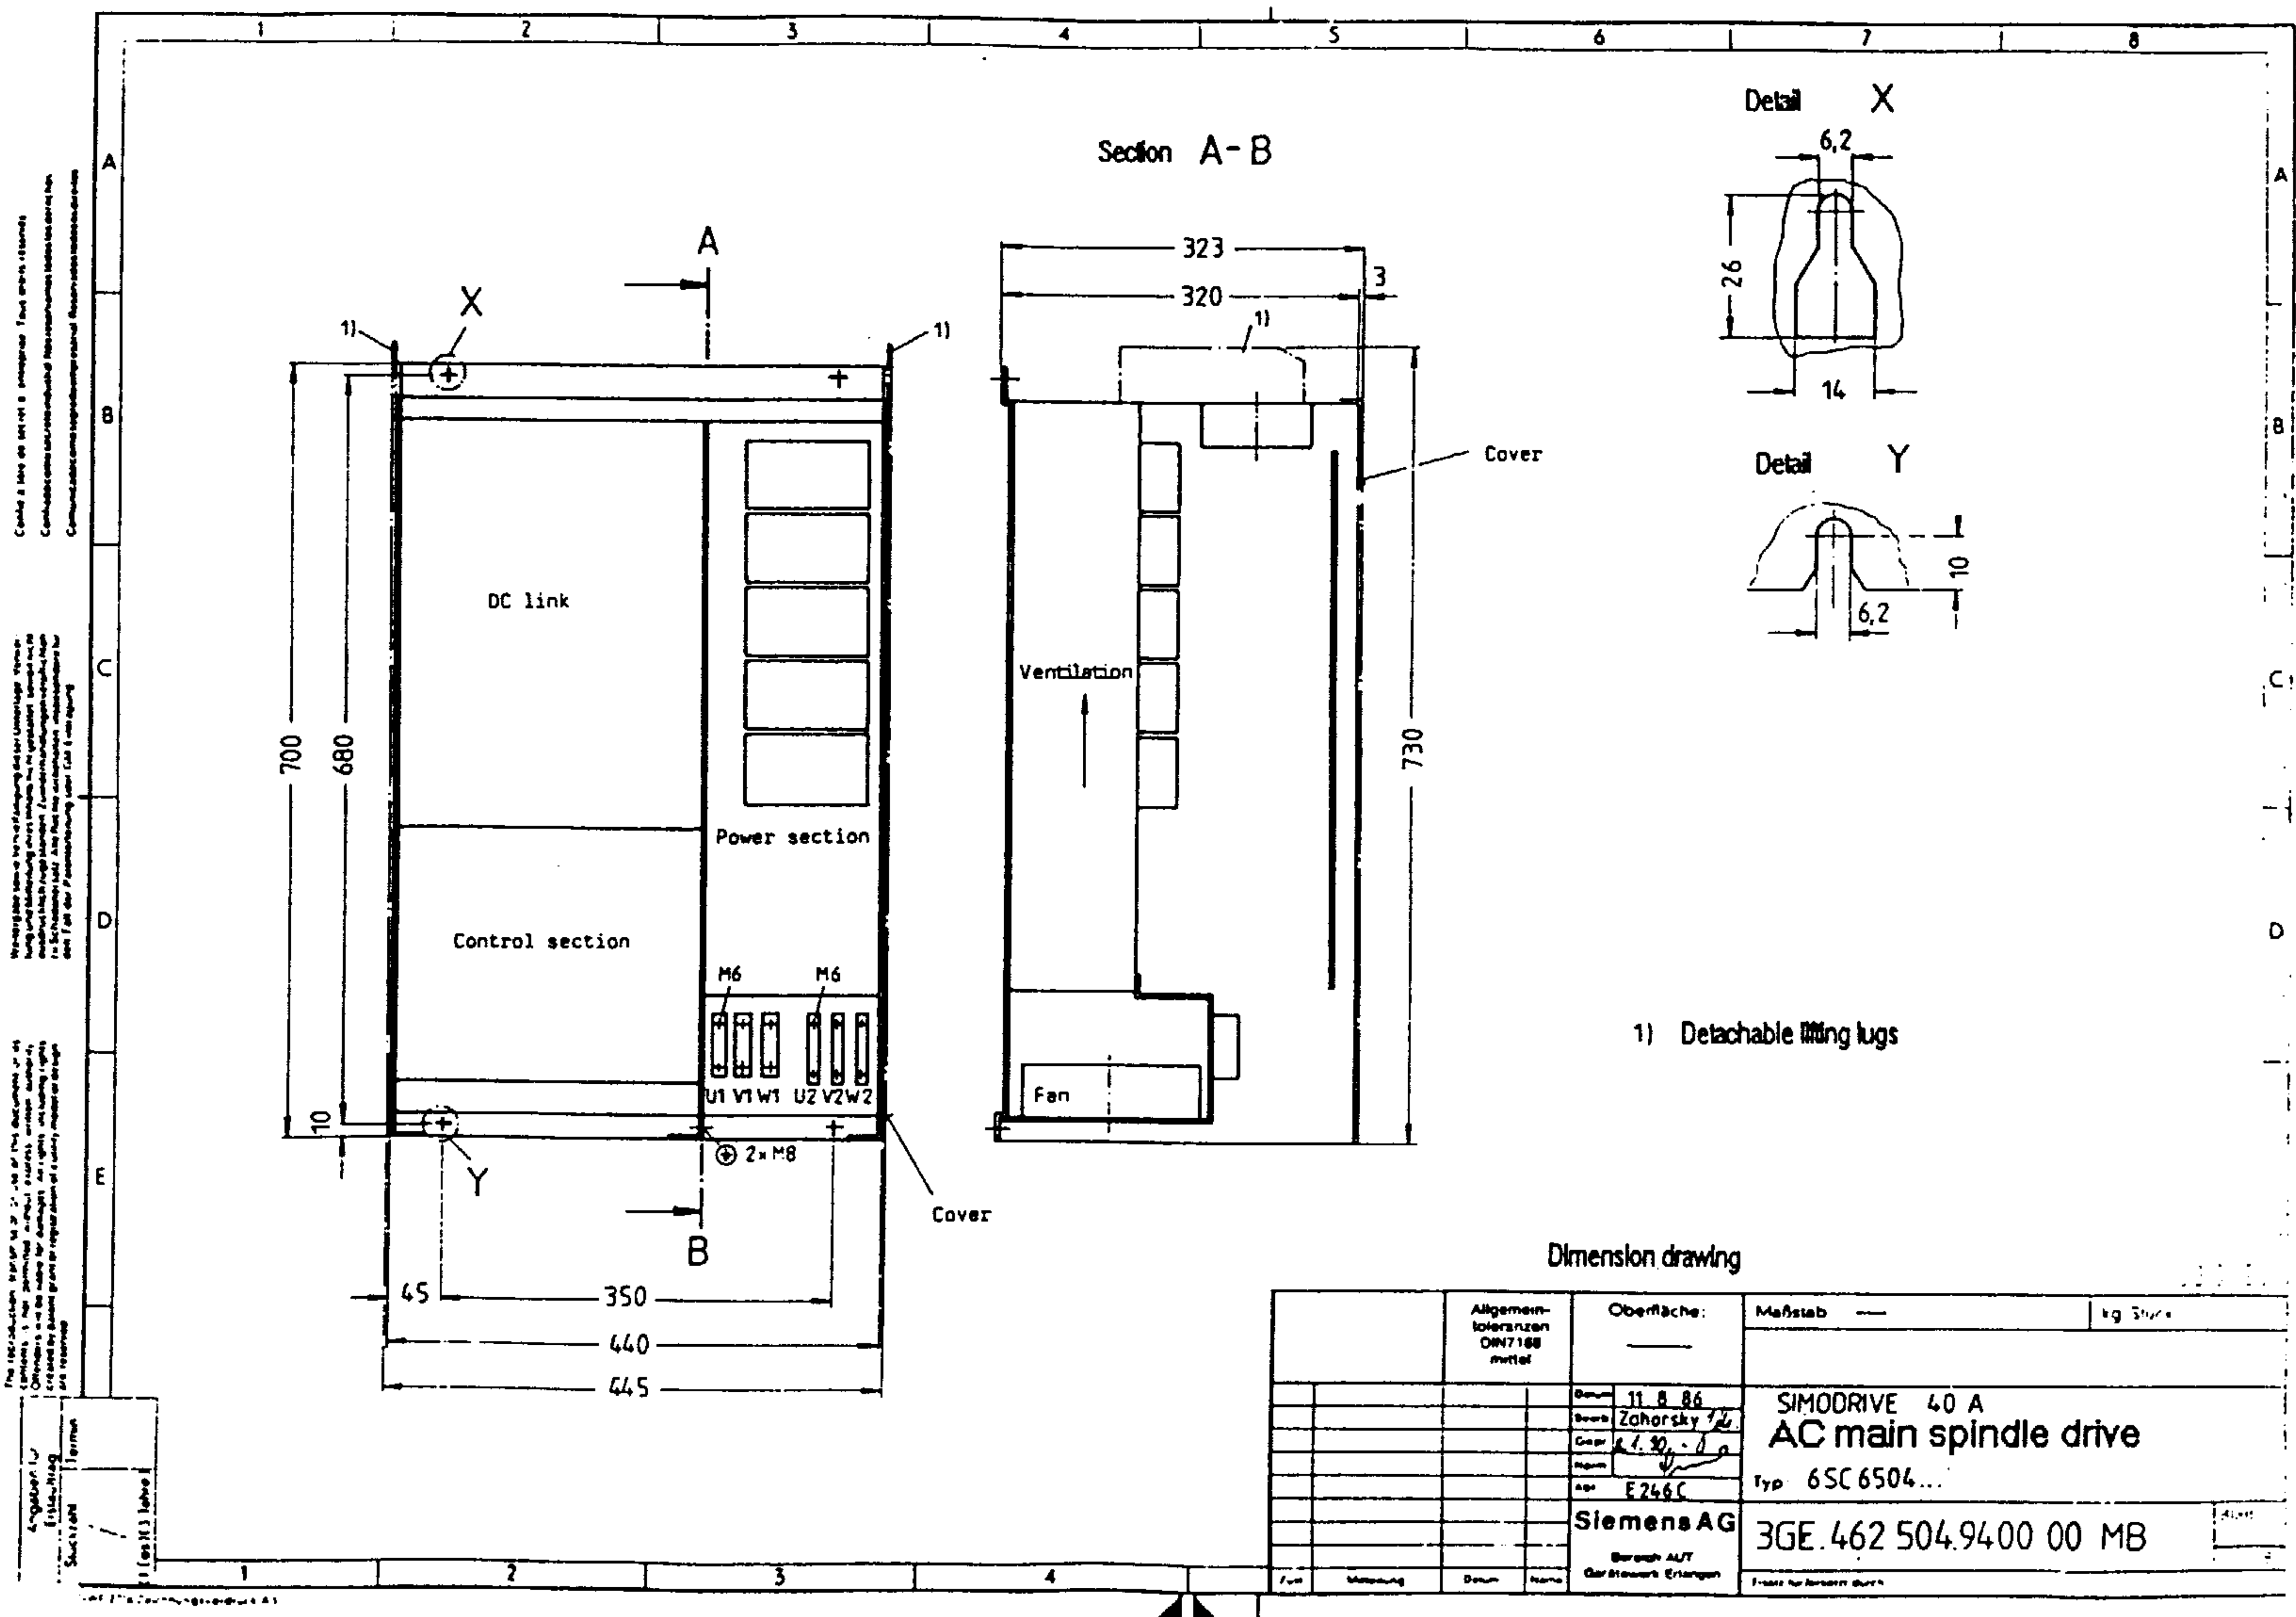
Dimension drawing for 6SC6504 and 6SC6506
